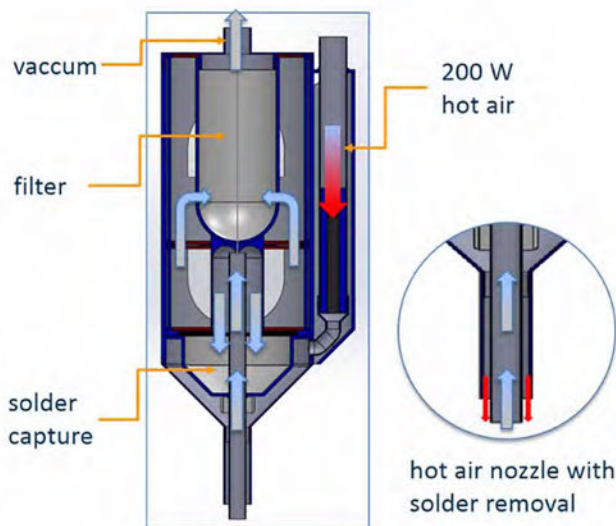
Scavenging system for residual solder removal during SMT rework and mounting.
